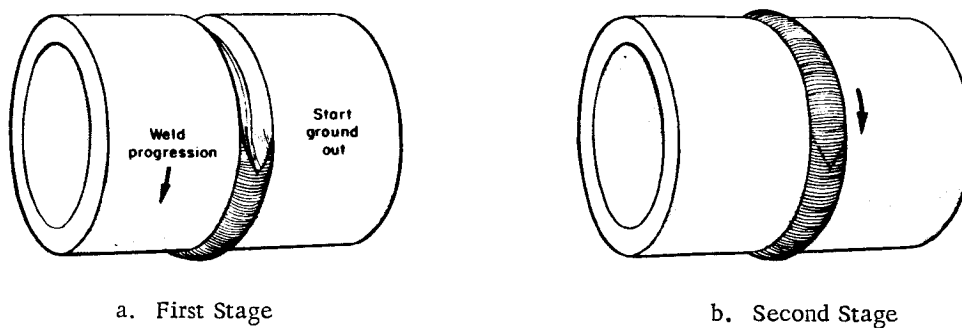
SUGGESTED STEP-BACK TECHNIQUE FOR OVERCOMING COLD-START DIFFICULTIES WHEN WELDING PIPE WITH THE GAS-METAL-ARC-WELDING PROCESS (REF. 45)
